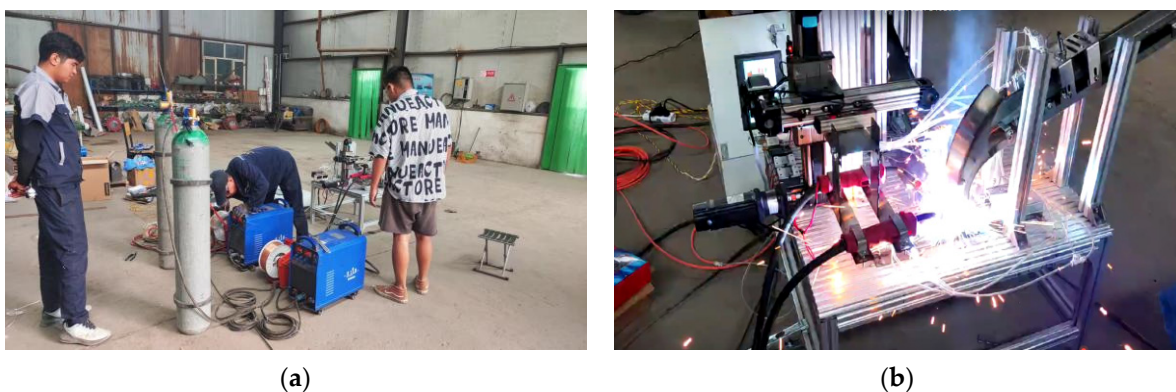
Factory test of cotton seeder duckbill welding robot. (a) Welding test site; (b) welding test in progress.
